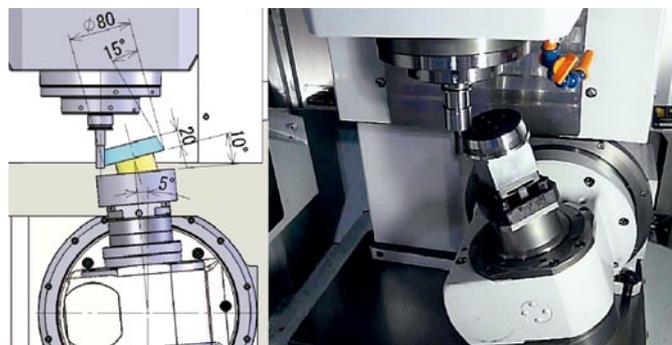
Simultaneous 5-axis machining of a cone frustum
